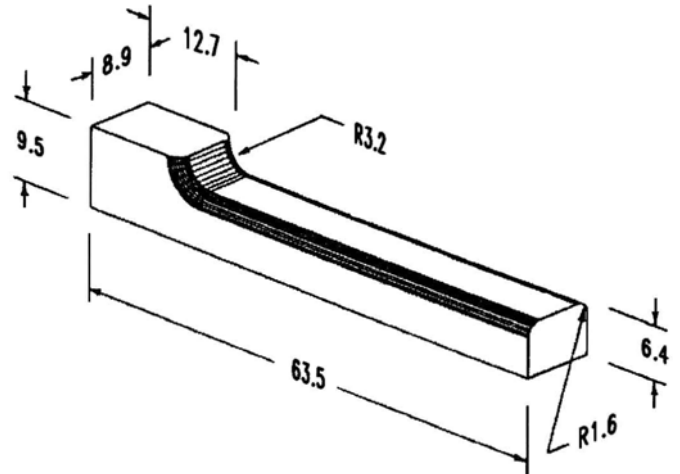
Schematic drawing of the modified Bruggen fatigue specimens. Dimensions are in millimeters.
